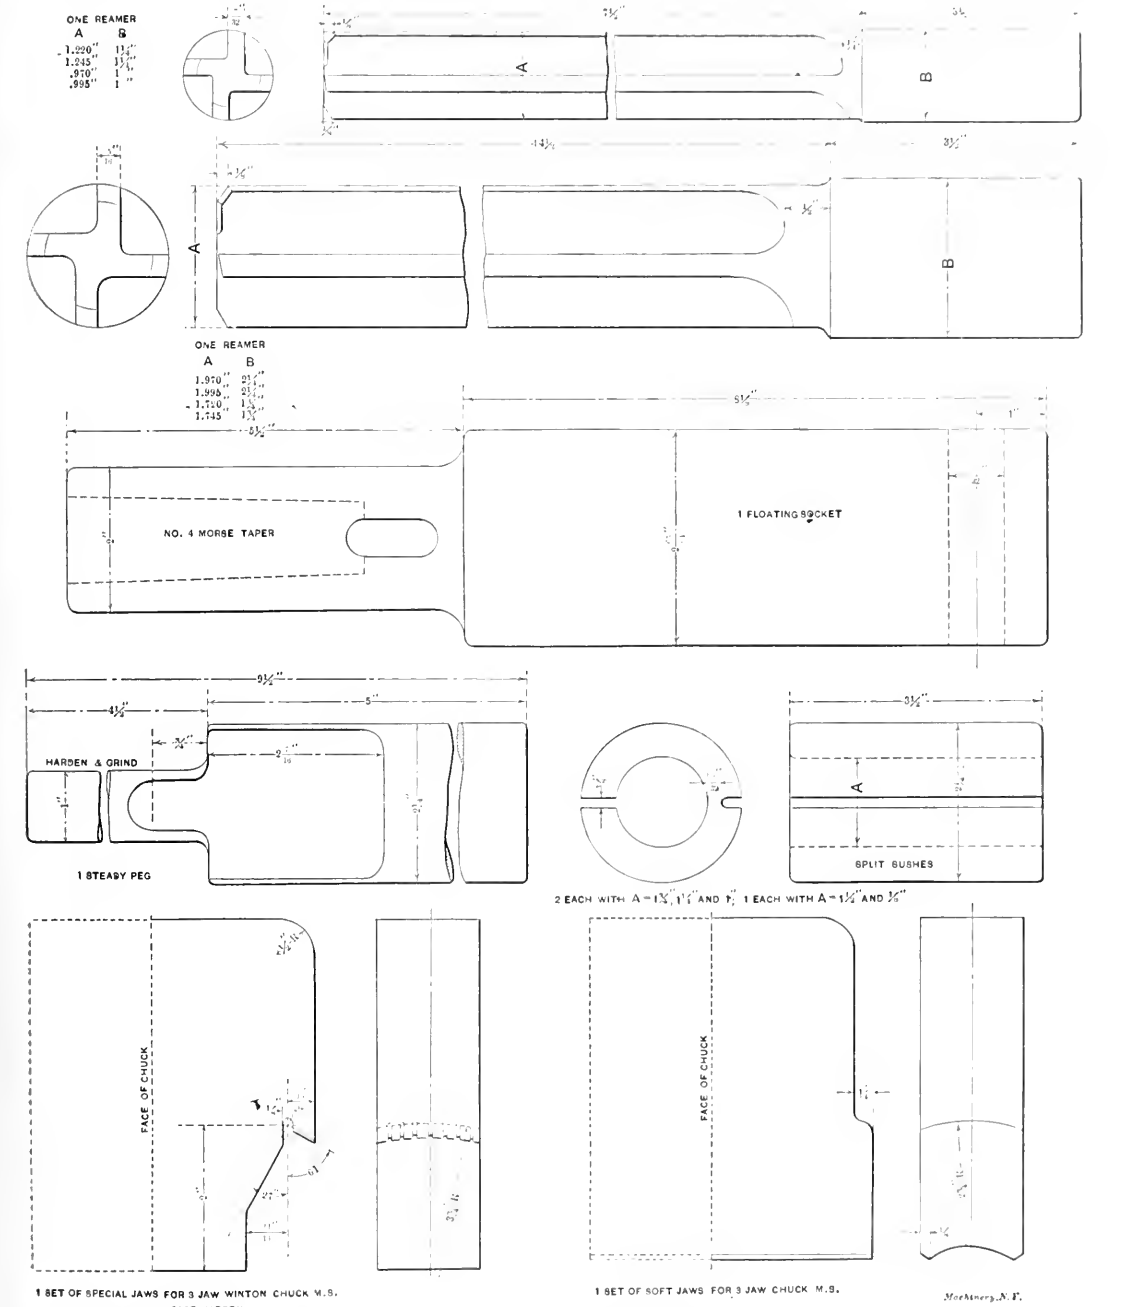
Reamers, Collets, Chuck Jaws, Etc.
